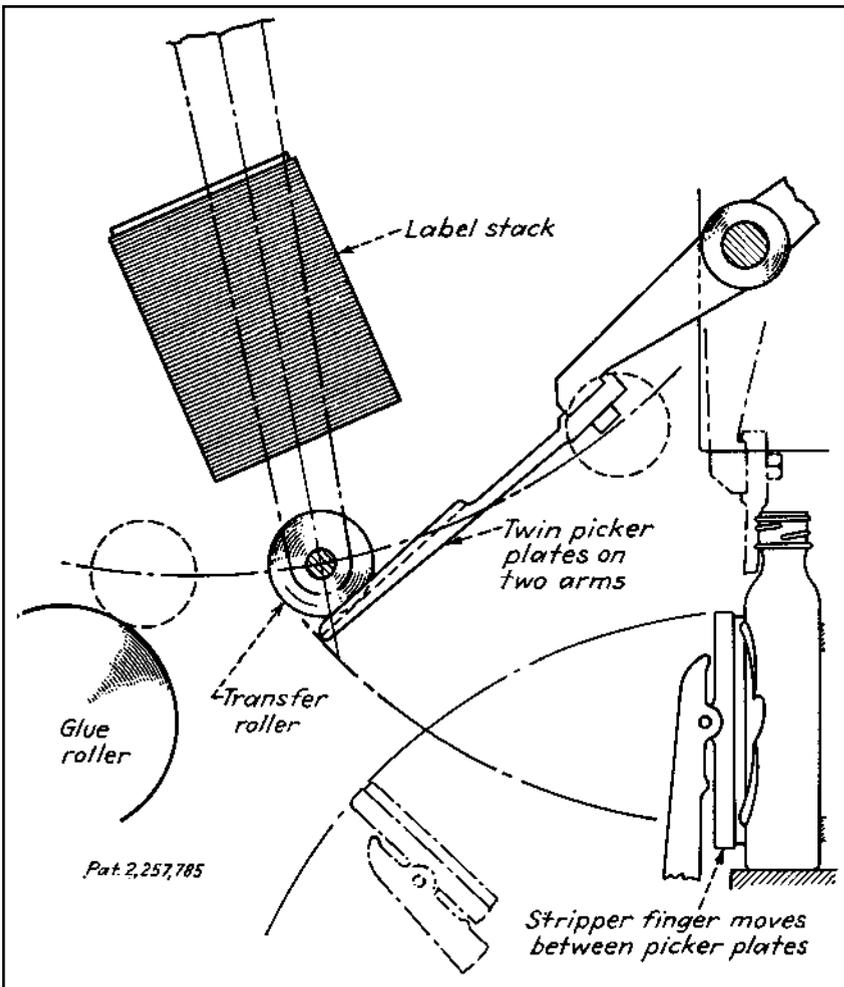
The bottom label is spread with glue by two abutting glue-coated picker plates, which separate during contact with label stack, then carry the label to the bottle.
